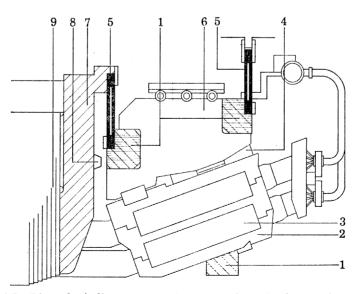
Principle of flexible end winding supports: 1, support rings; 2, plates and spacers; 3, end winding; 4, wedge with tension bolt; 5, spring leaves; 6, bracing plate; 7, core end press plate; 8, axial stop; 9, stator core.
